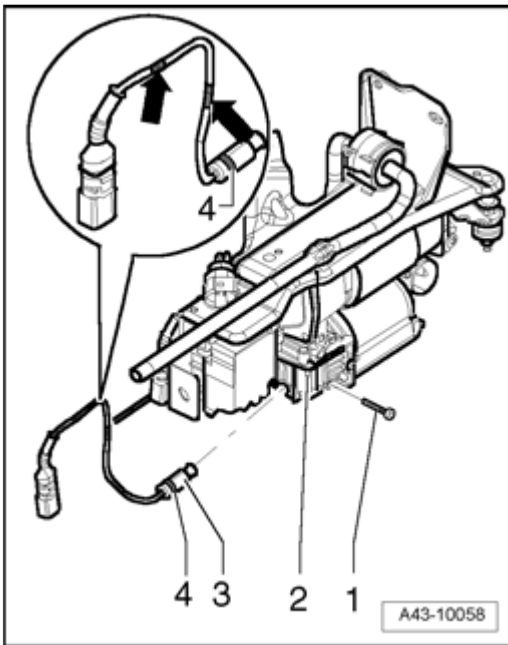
Identifying Bolt, O-Rings, Housing, And Level Control Pump Temperature Sensor
